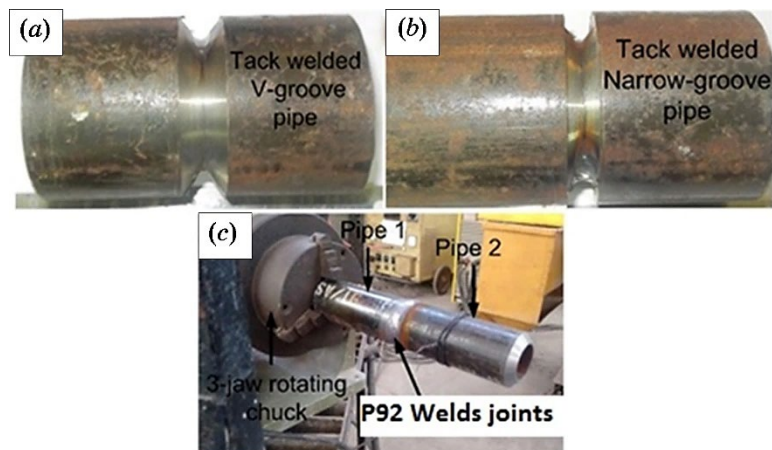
(a) and (b) grooved pipe joints with tacking, (c) experimental set-up with welded pipe joints.
